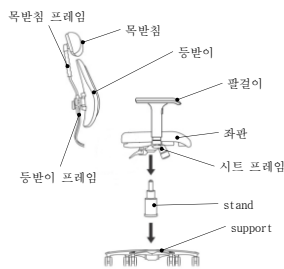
Exploded view of the office chair [www.duoback.co.kr]
